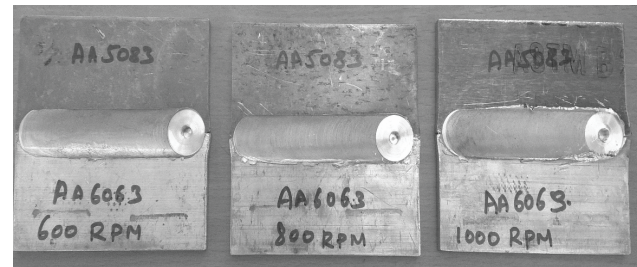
Friction stir Welded specimens of different tool rotational speeds
